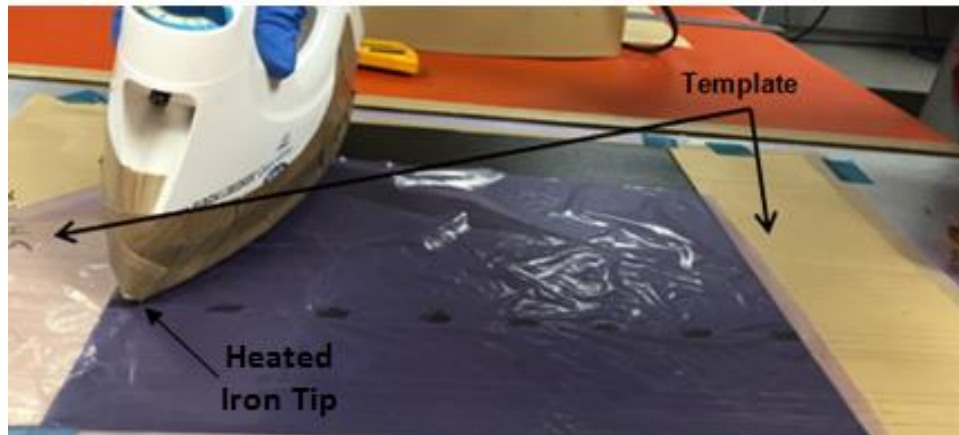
ENF specimen fabrication: heat tacking fibers using a template
